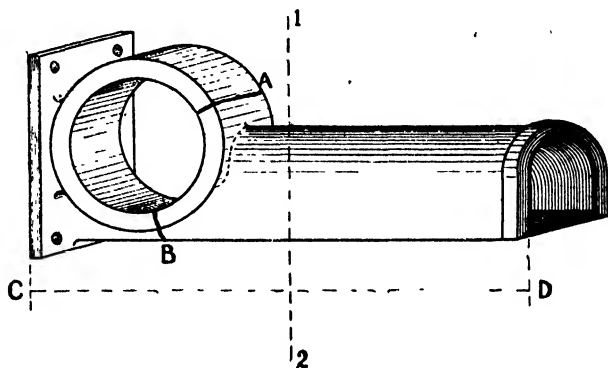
CASTING DISTORTED THROUGH FRACTURE
